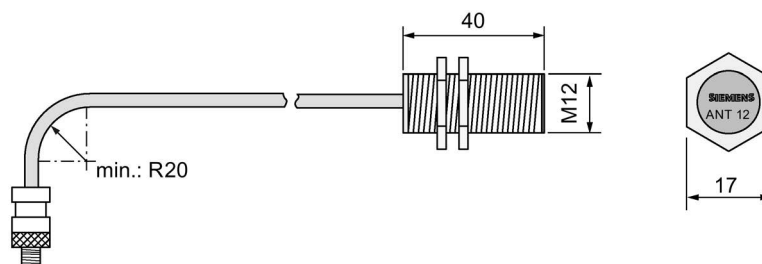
Dimension drawing ANT 12 (all values in mm)
